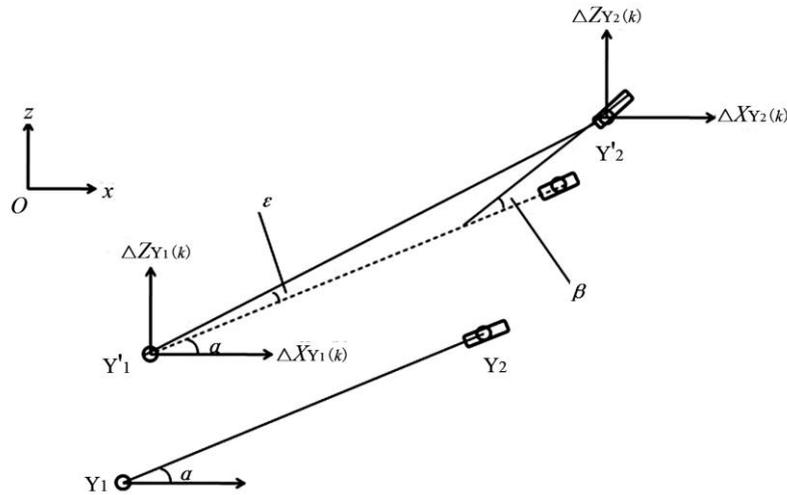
locating accuracy affected by the fabricating error of the fitting hole and groove
